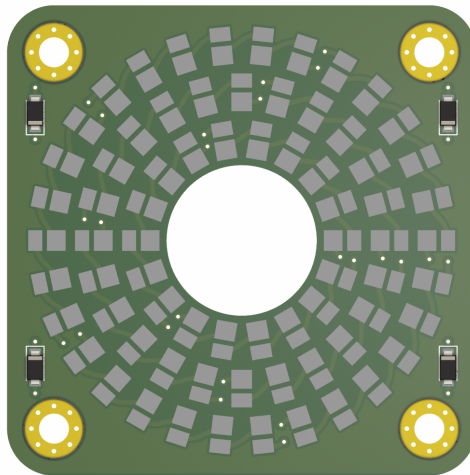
Computer render of the designed LED-ring PCB. The center of the PCB contains a hole for the camera lens to see through.
